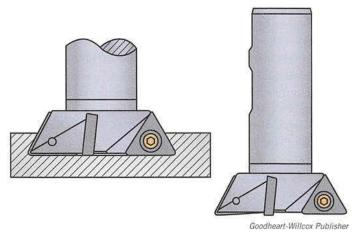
A dovetail cutter with indexable insert cutting edges.
